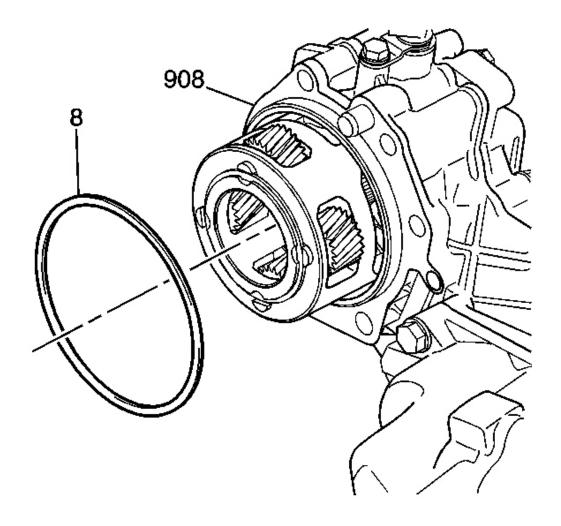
View Of Case Extension Seal Courtesy of GENERAL MOTORS CORP.
